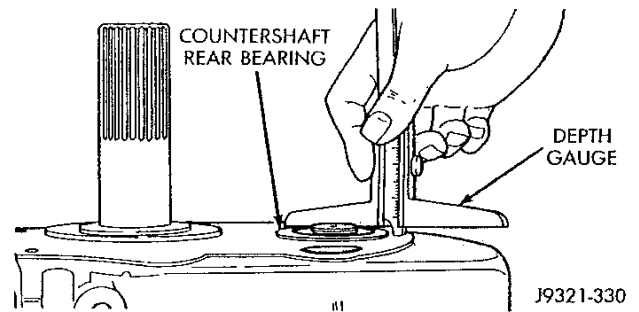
Measuring Height Of Countershaft Rear Bearing Race
